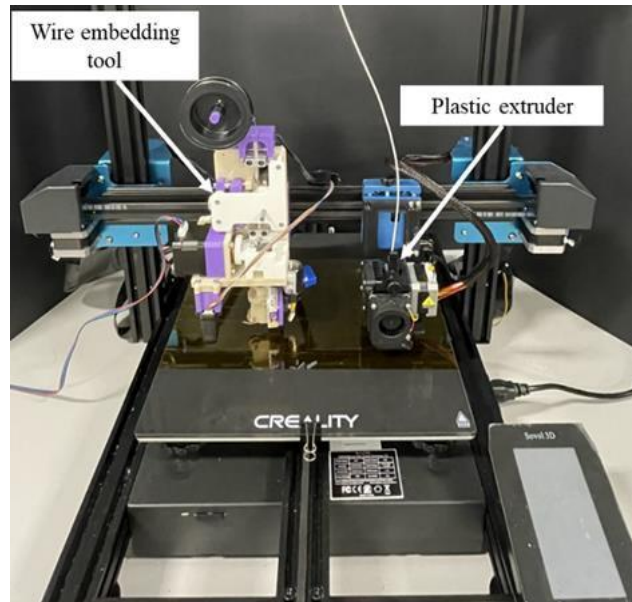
Figure 1. Sovol SV04 IDEX 3D printer with integrated wire embedding tool
